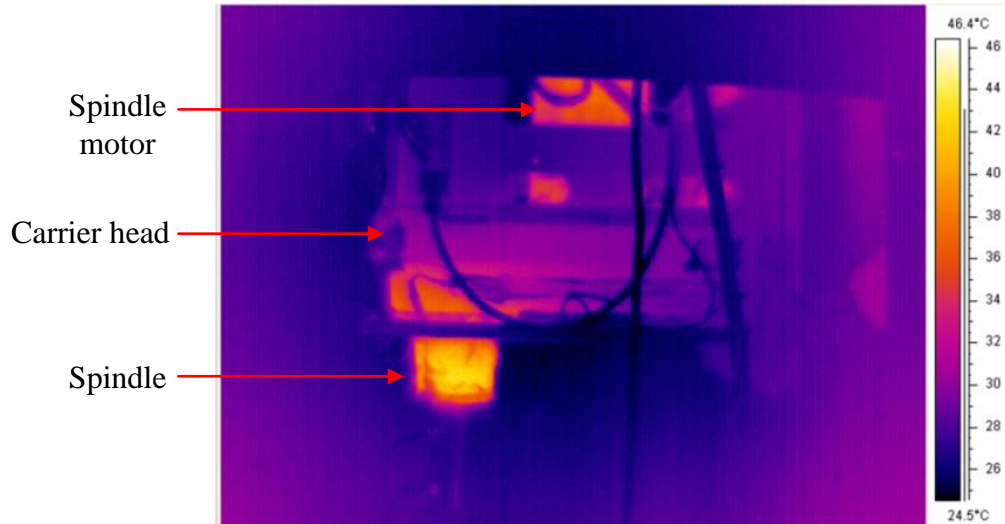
Thermal image of machine head after one hour heating (8000rpm)
